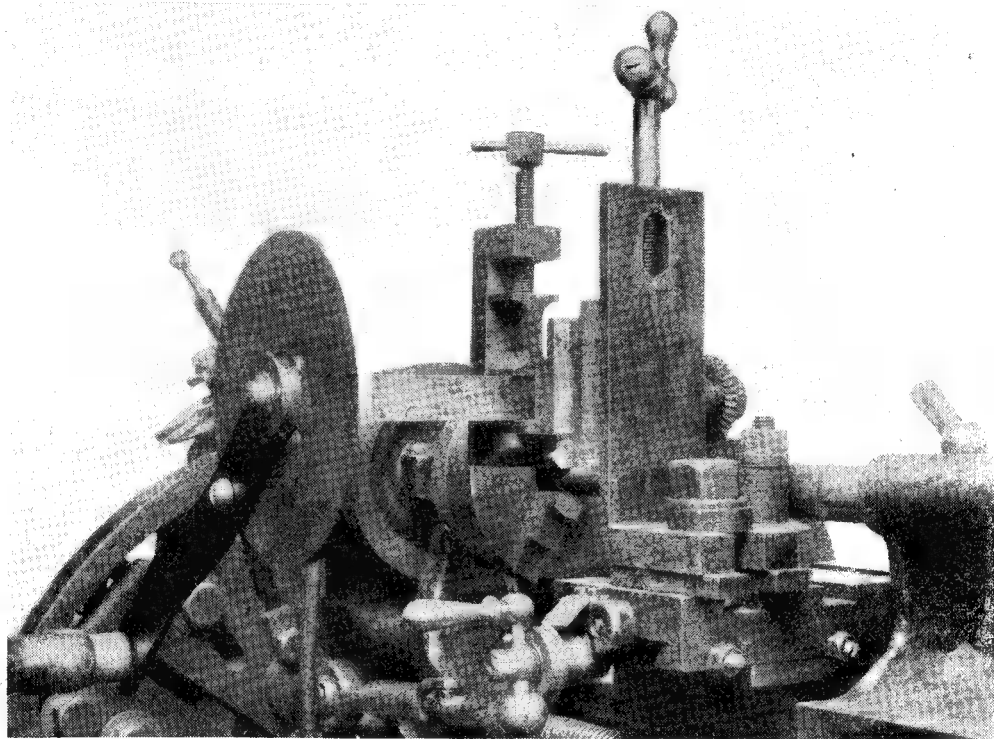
Setting-up of cutter and blank for hand milling a 21-tooth 16 d.p. change wheel
